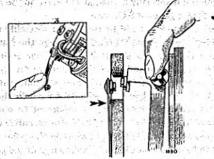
Setting the contact blade to ensure contact with the pedestal ridge
